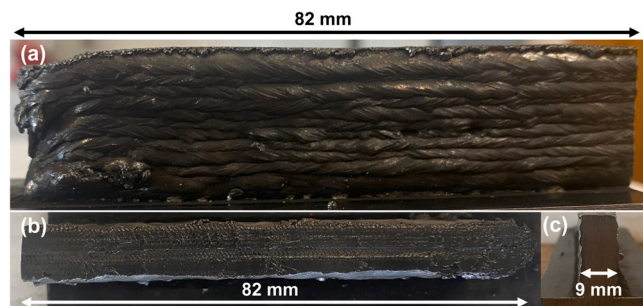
Macroscopic aspects of the in situ interlayer hot forging arc plasma directed energy deposition of Inconel® 625: (a) side view, (b) top view, and (c) cross-section of a single-bead multi-layer 3D printed part.
